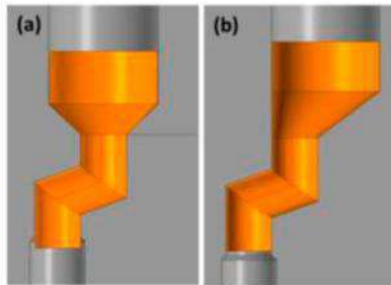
A scheme of the direct extrusion combined with ECAP-PC: die with axisymmetric deforming section (a); die with non-axisymmetric deforming section (b)
